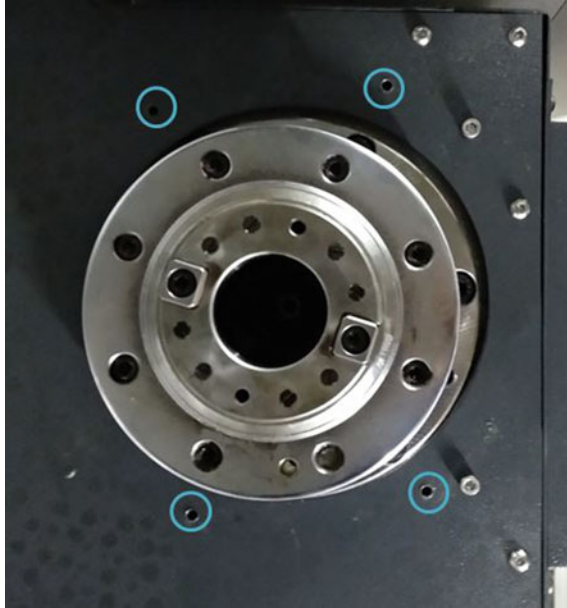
Holes in stationary base in VMC machine (macpower ECO-500 model)
